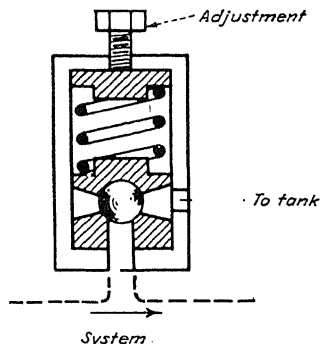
Relief valve. (Courtesy of Product Engineering.)
